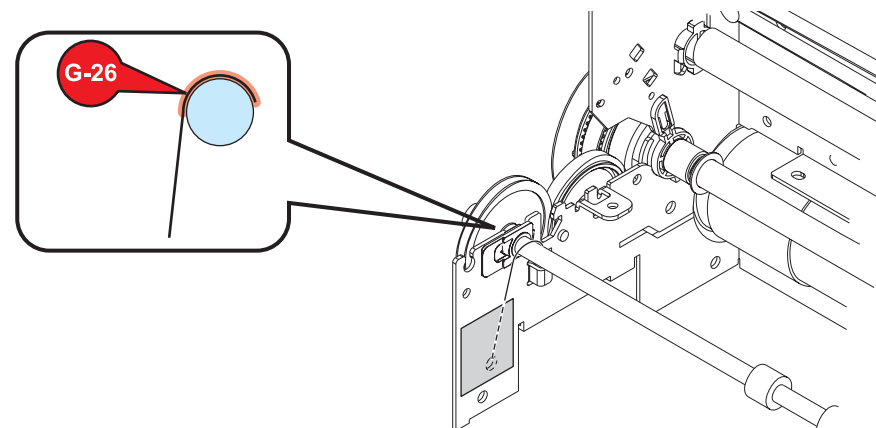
Lubricating of Paper Eject Roller Unit Grounding Spring
